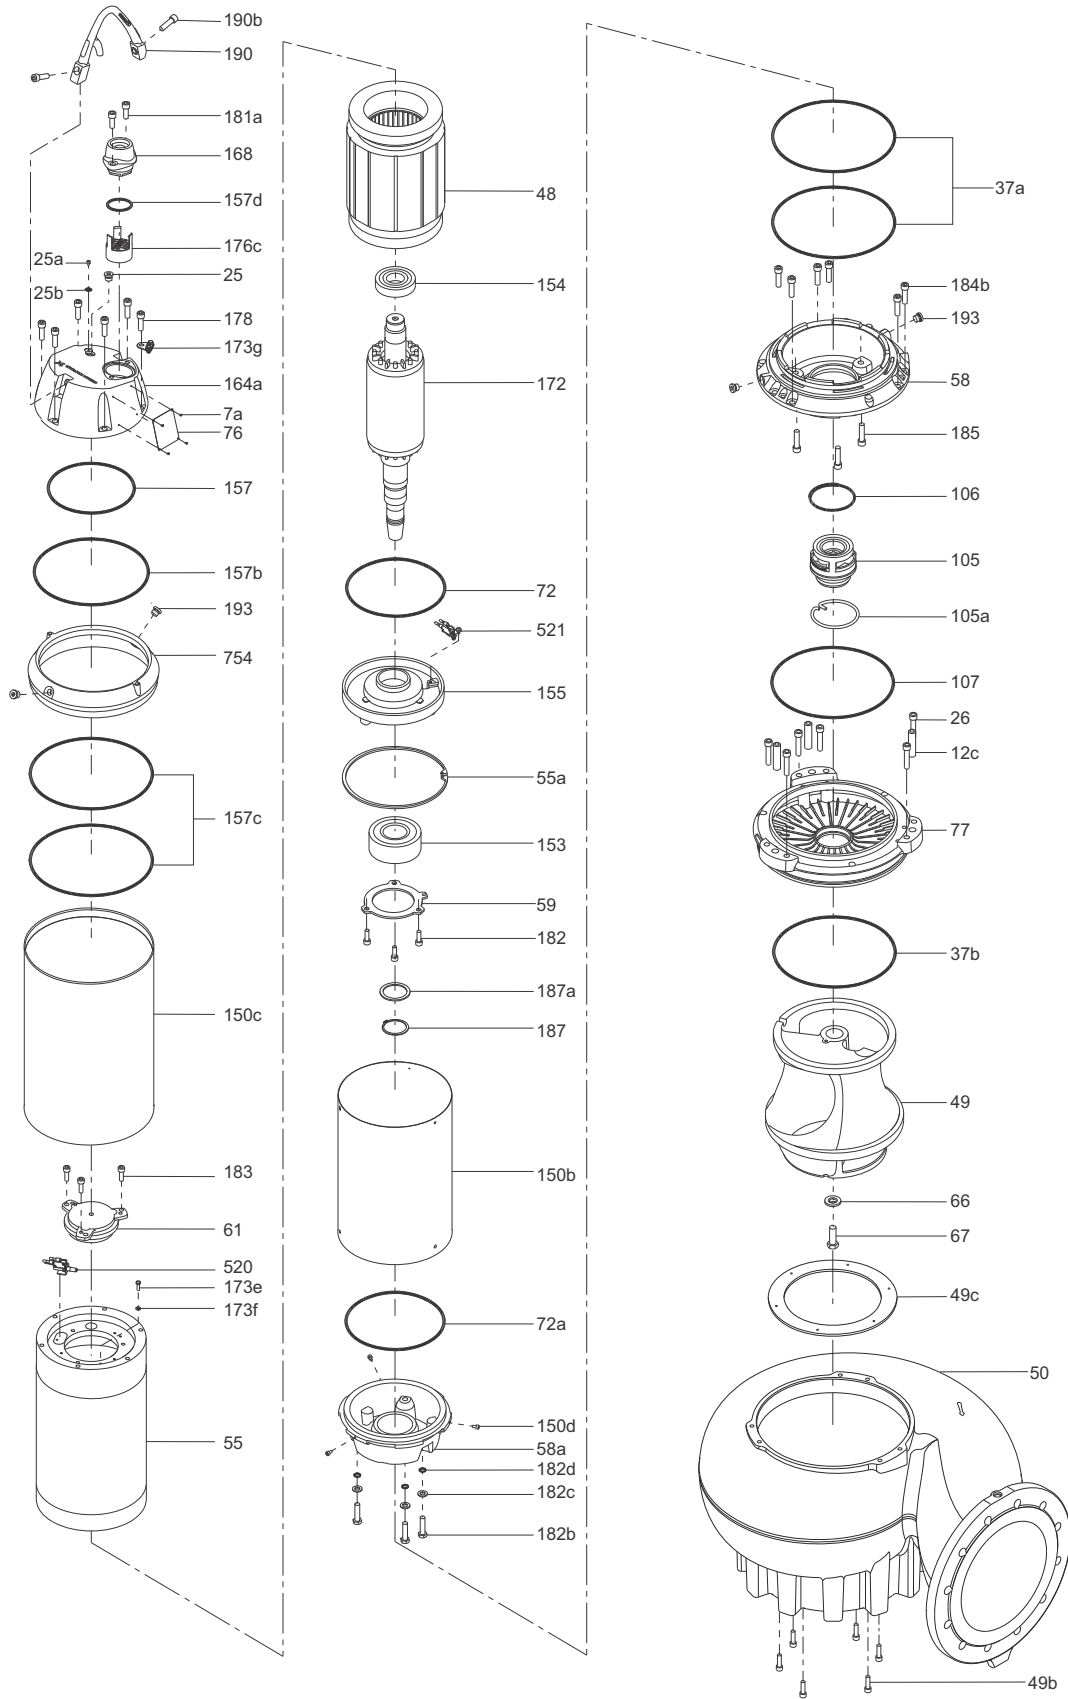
Exploded view, SE pump, explosion-proof version, 6-poles
